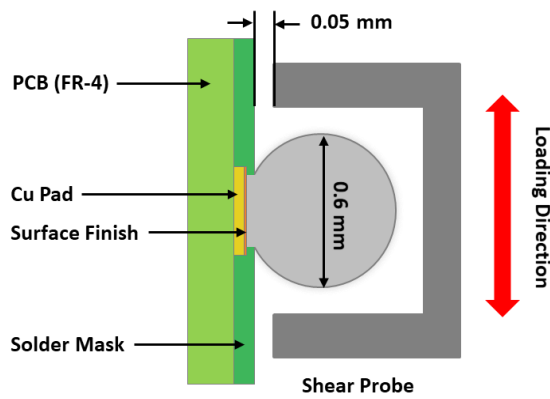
Schematic of shear fatigue test with individual solder joint
